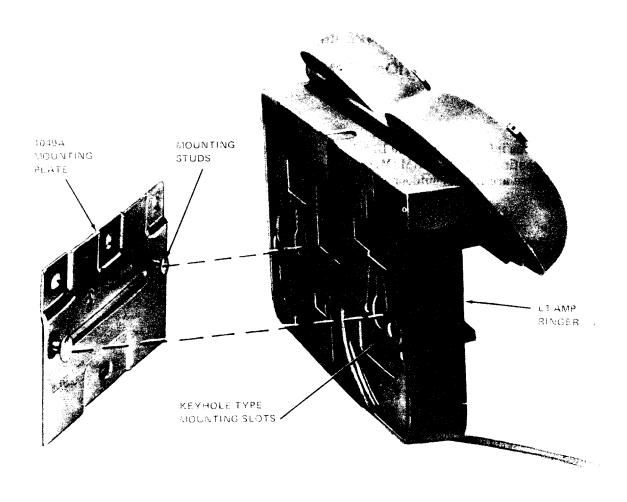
₱L1AMP Ringer and Mounting Plate (Indoor Installation) ♦
